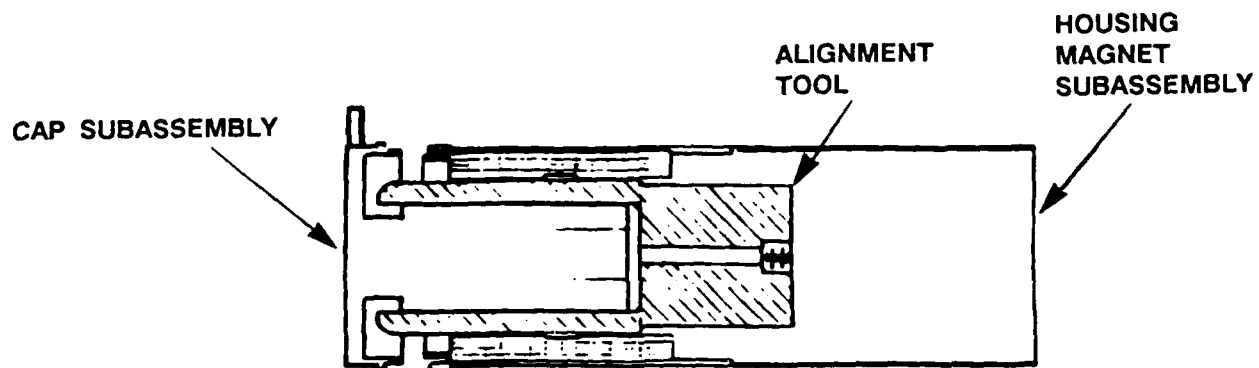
Housing Magnet and Cap Subassembly with Alignment Tool in the Piston
